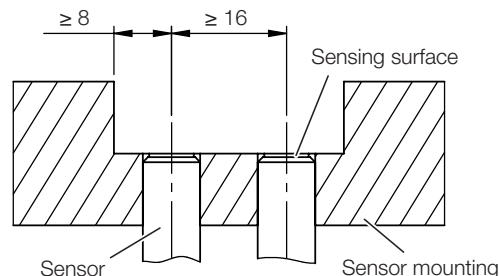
Clearances and minimum distances of flush-mount sensors
